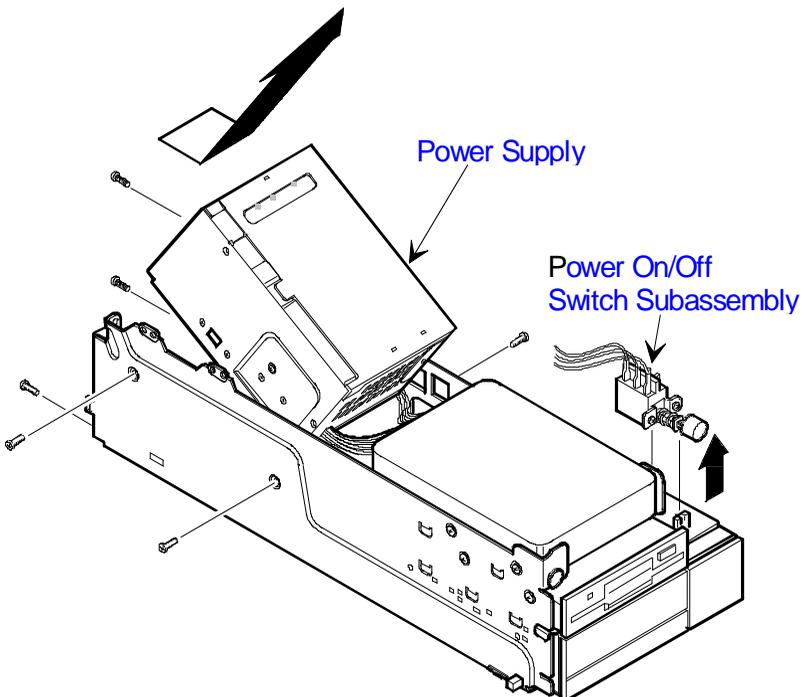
26 Removing the CELEBRIS GL Power Supply
